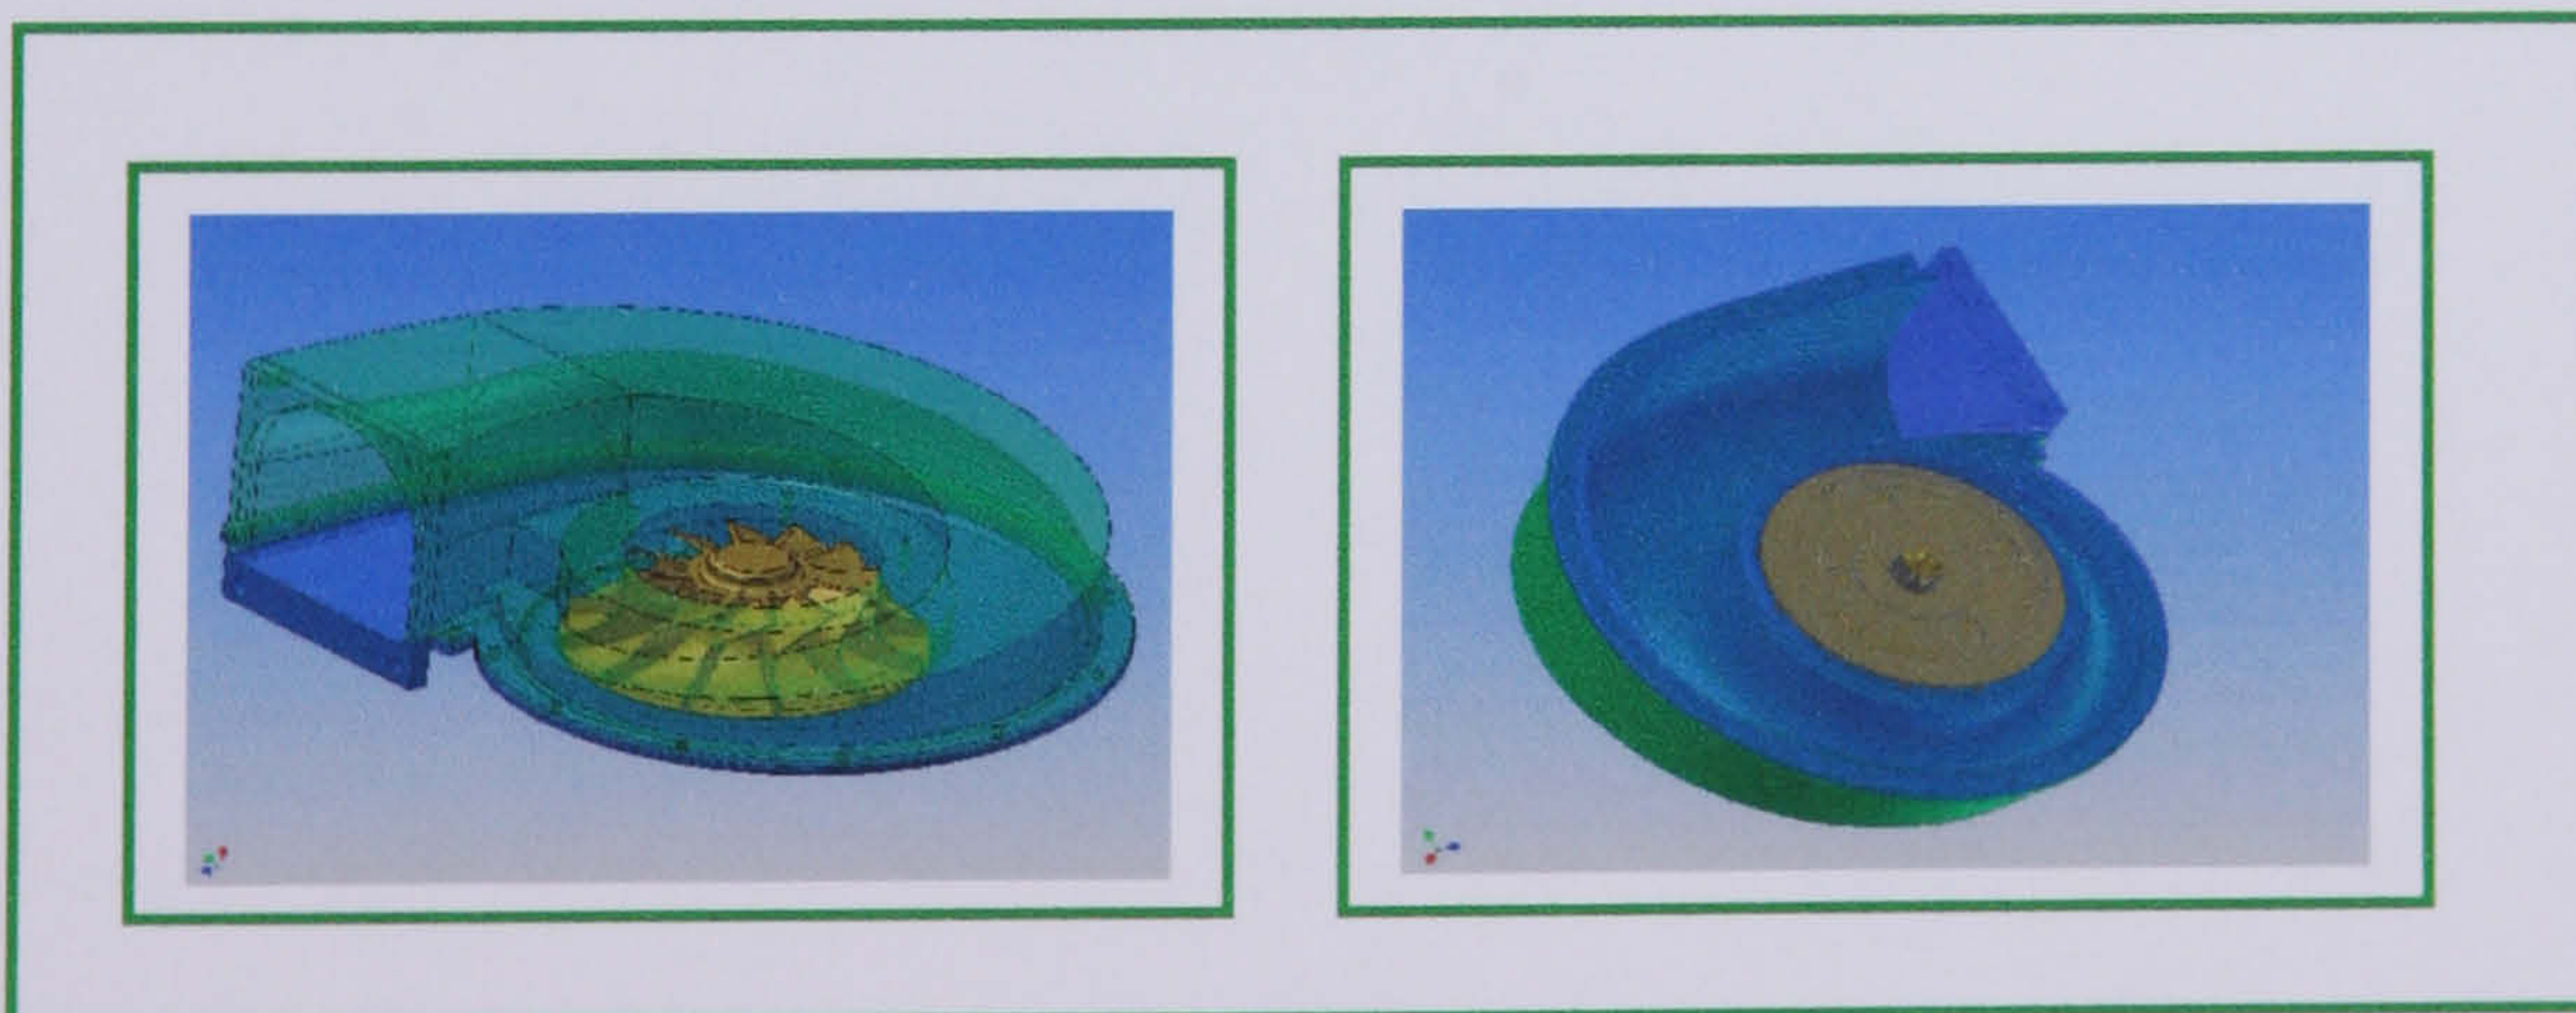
THREE DIMENSIONAL SOLID MODEL OF THE IFR TURBINE ASSEMBLY
